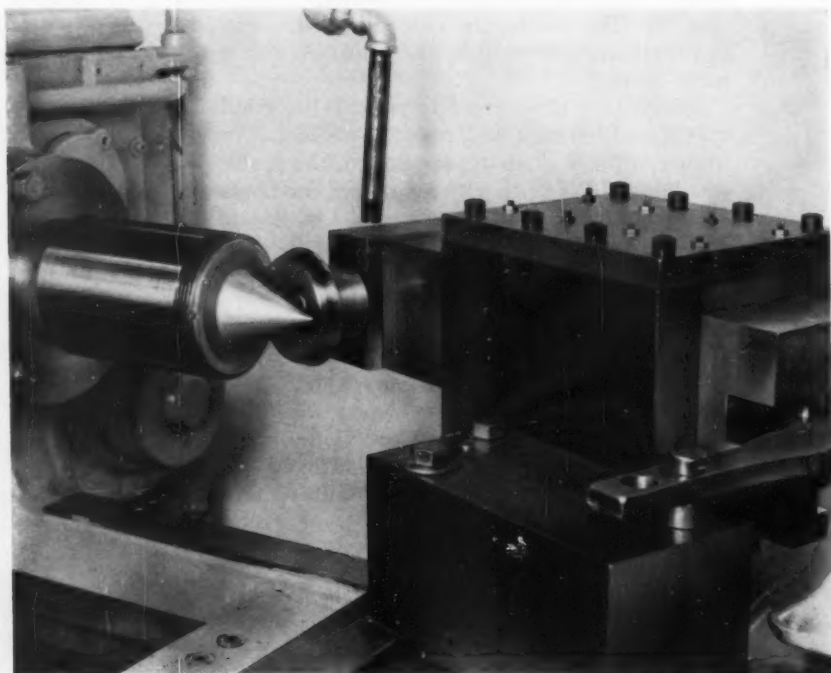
Collar for retaining the blank has been removed in order to show the roll-formed part. The roll is traversed through a compound linkage by turret mechanism.
